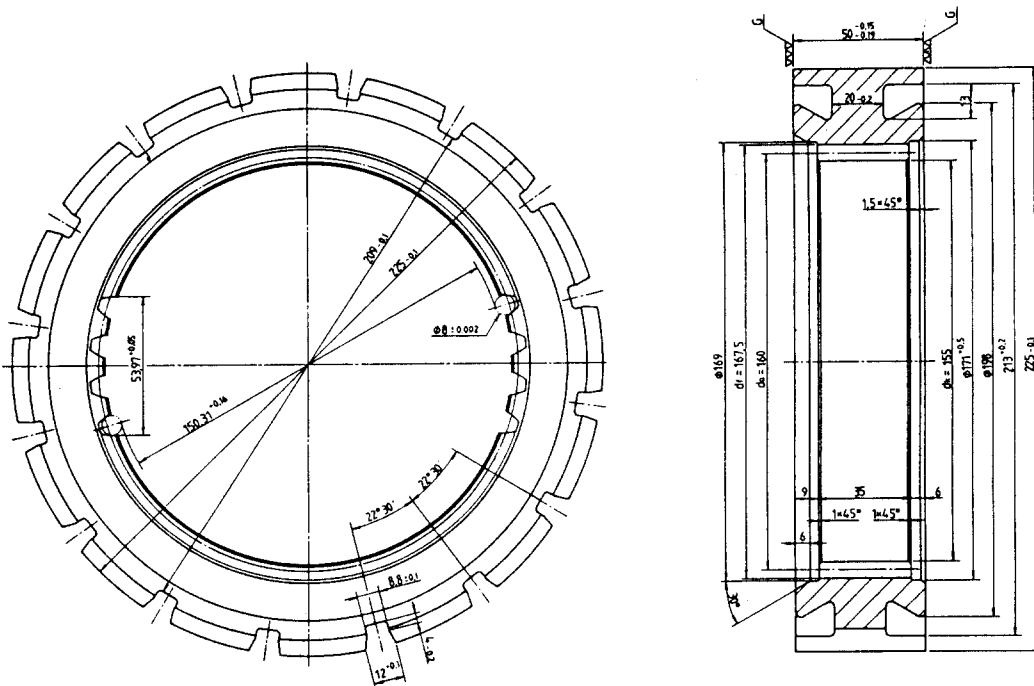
Dimension of Inner Star of Damping Flexible Coupling
